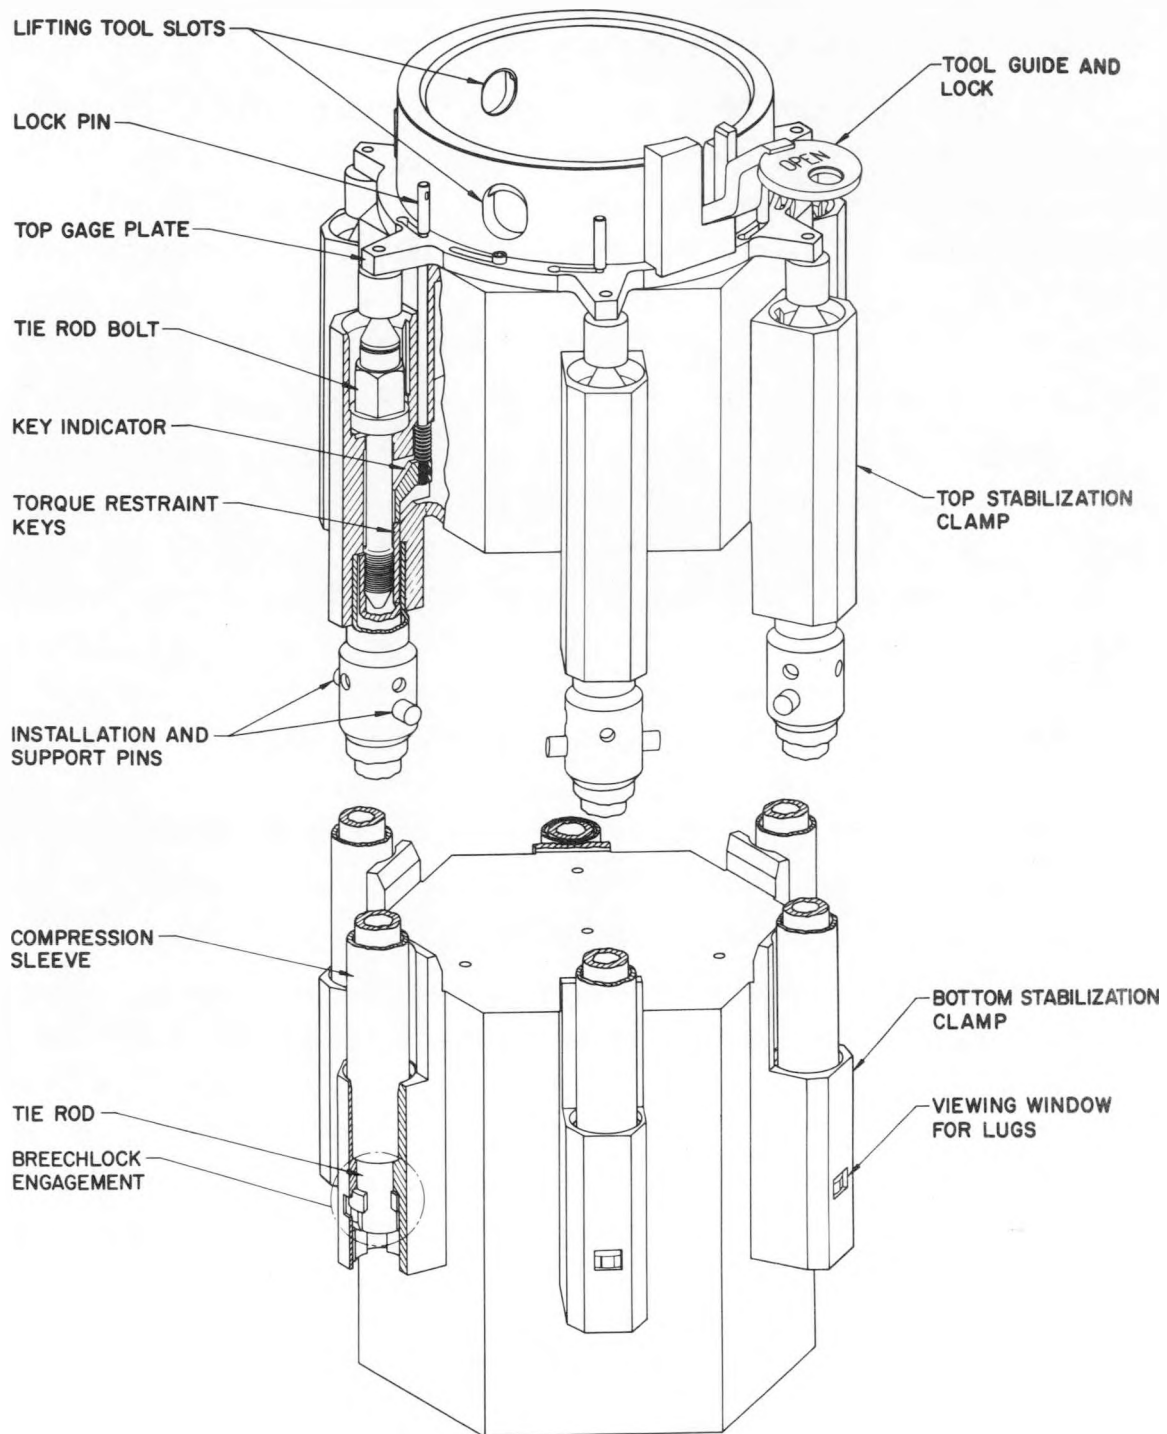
LWBR Seed Stabilization Clamp Assembly
